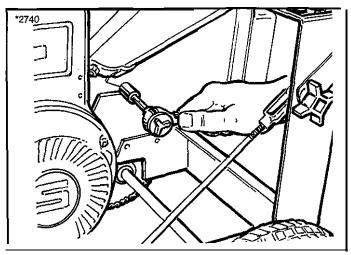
Loosen Discharge Tube Hex Head Nuts - Left Side
